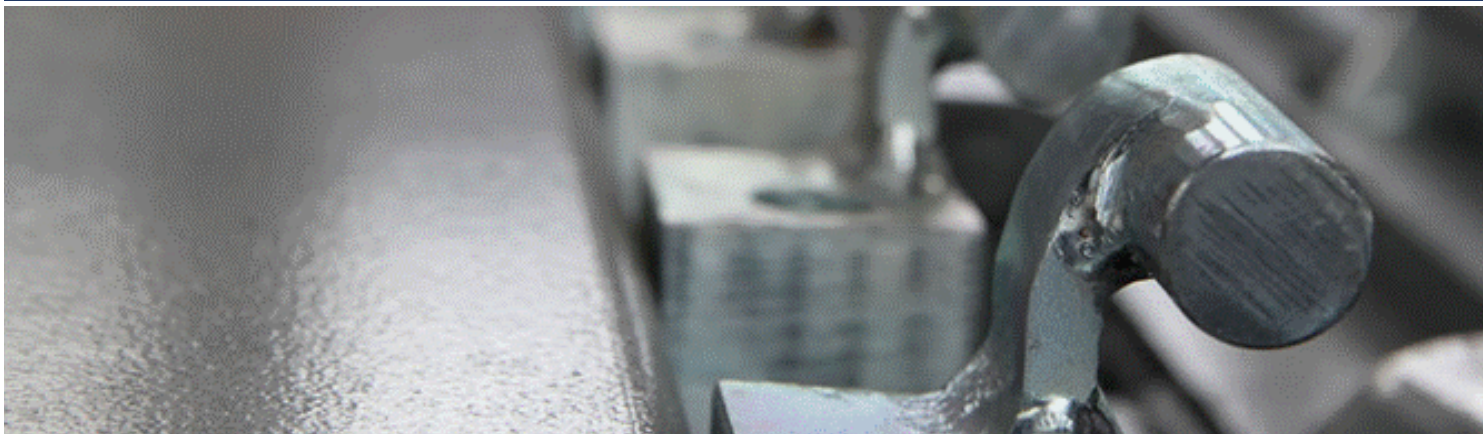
A close-up view of mandrels on a bending machine. The mandrels are positioned to align with a WWR mat's wires being bent by the manufacturer.
